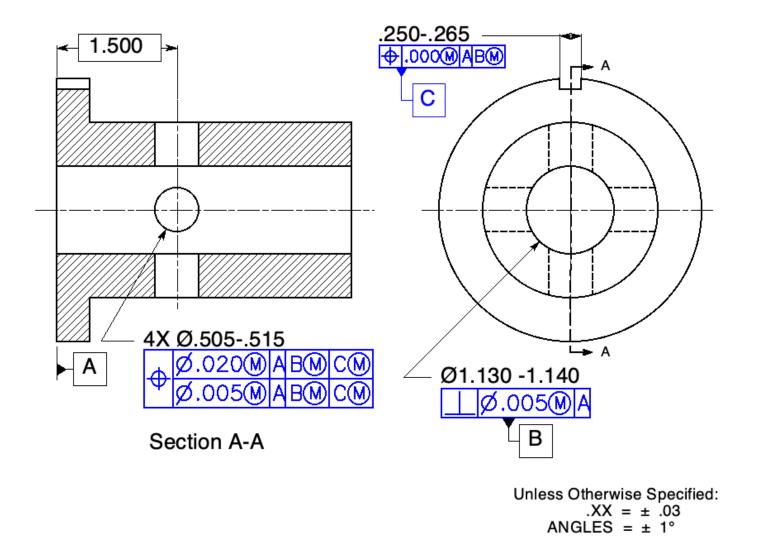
Tolerancing a four-hole pattern with a composite positional tolerance: Prob. 4.
